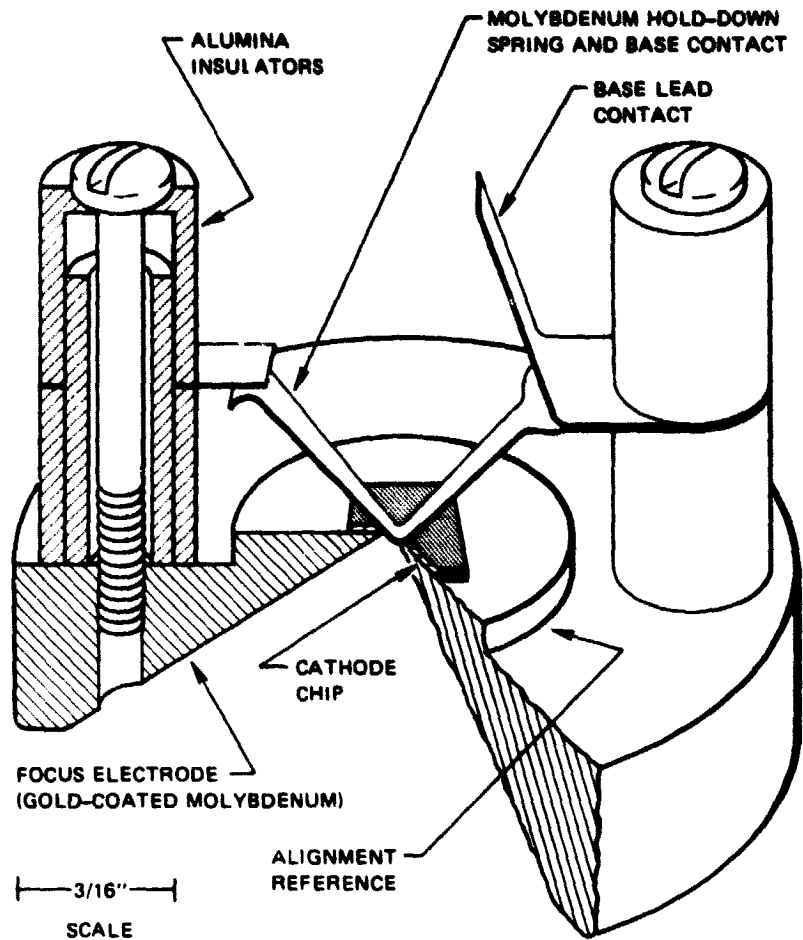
ISOMETRIC DRAWING OF CATHODE MOUNT AND FOCUS ELECTRODE
